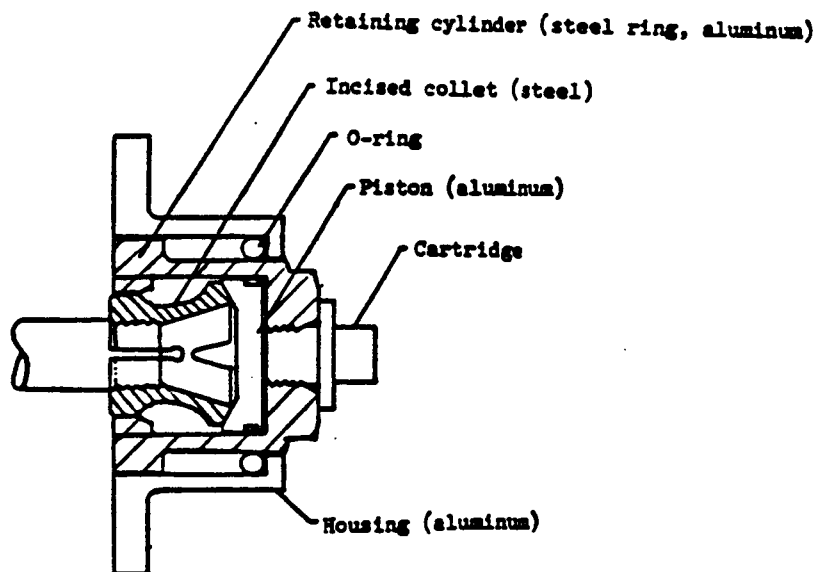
Explosive bolt in chamber on end of Hopkinson bar.
